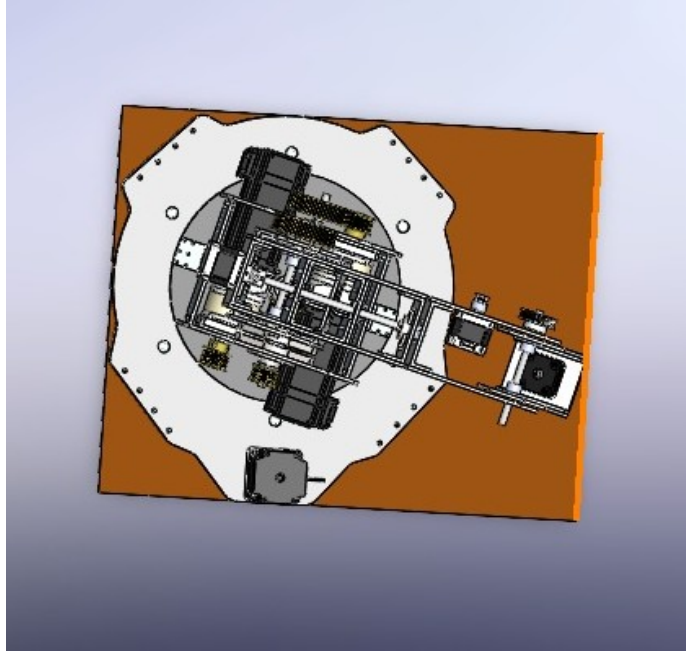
Top-down view of the redesigned base gear and mounting plate, showing the scalloped slewing-ring profile and the motor bolt pattern.
